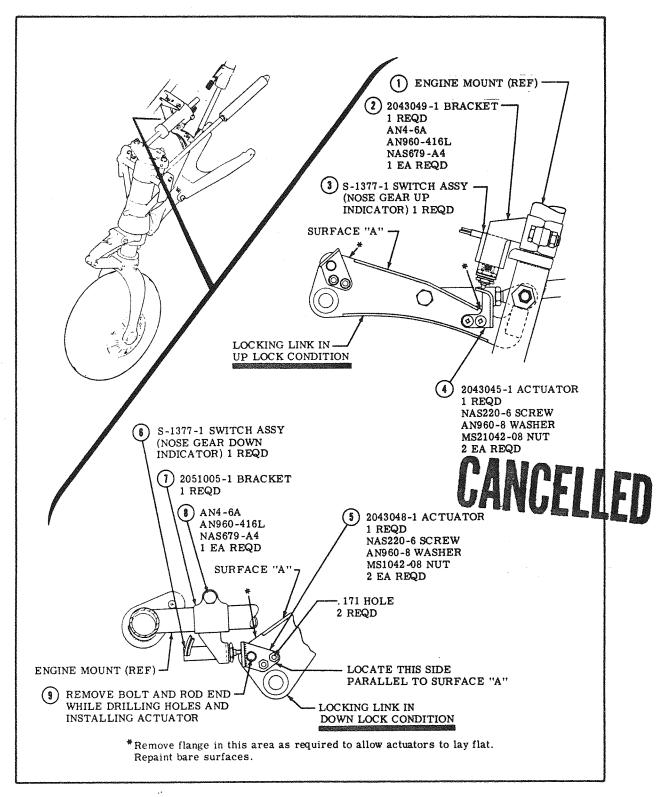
Nose Gear Up & Nose Gear Down Indicator Switches Installation
